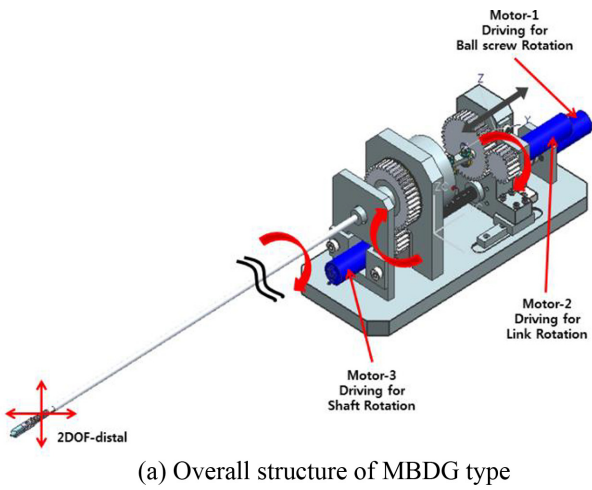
MBDG type mechanism with a ball-screw, link, driven disk and motors
